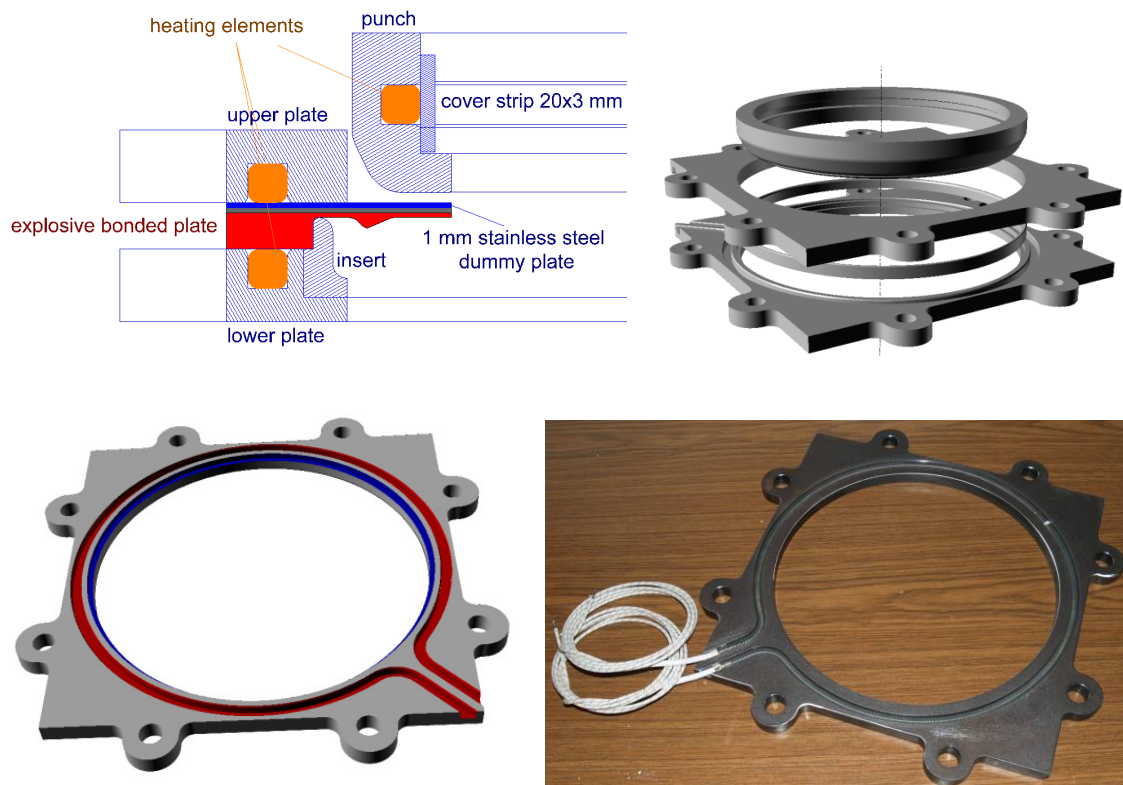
design of the press tooling. Top left - cross section of the tooling and workpiece; right - the 4 parts of the tooling; Bottom left - Lower Plate in 3D CAD; right - Bottom plate with heating element
